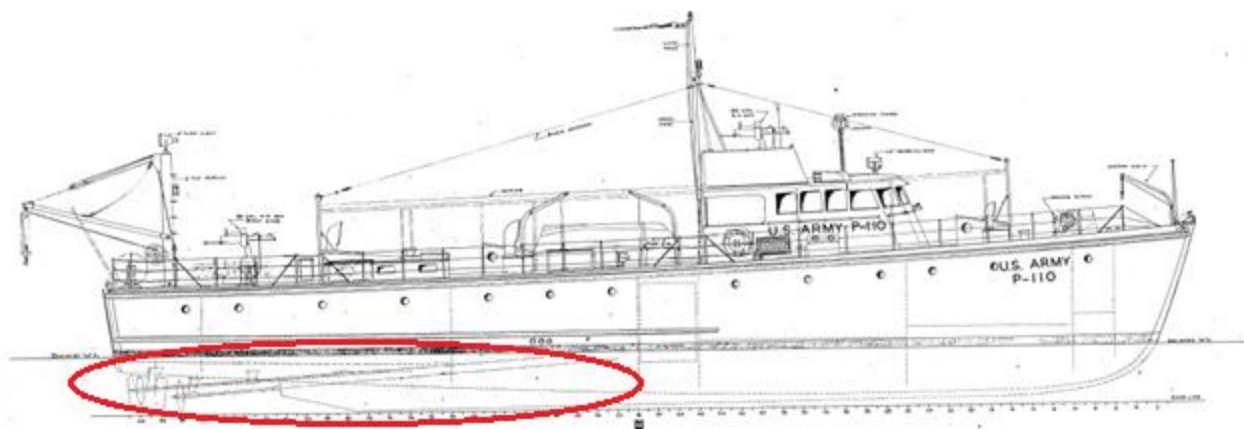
104' ARB Design 235A with a propeller shaft going through the keel circled in red (Document courtesy of Haggin Museum, 1942).
